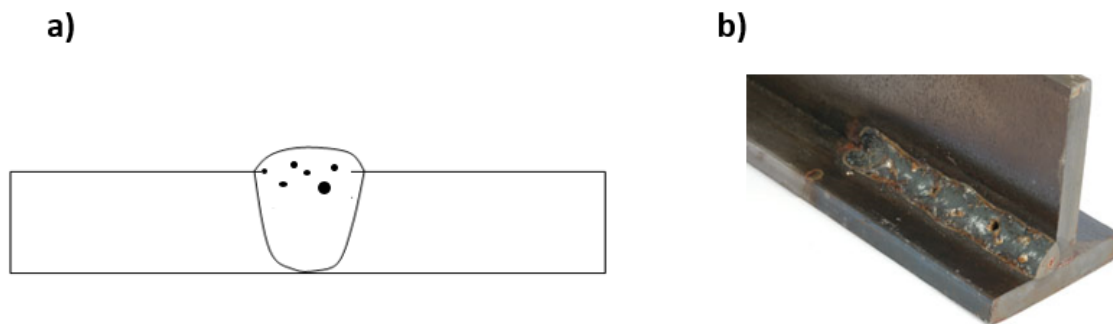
a) Cross section xy representing porosity. b) Real image: round holes in the weld bead are a sign of metal porosity [43].
